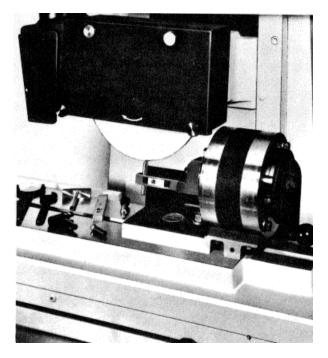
I. Continuous Radius and Tangent Wheel Truing Attachment.
